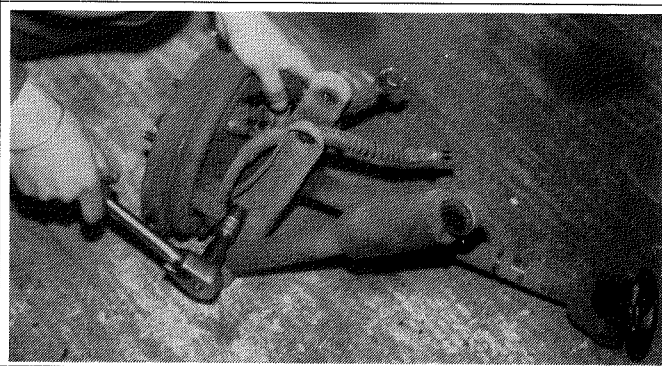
Right tools for the job! 1/2" drive with the correct size of surface drive socket, should give you the right amount of purchase to shift the rear trunnion bolt. This bolt has been known to seize and in the past I have resorted to hacksawing through the bolt either side of the trunnion watershields to free the vertical link and taking the link to a local workshop to have the bolt pushed out on the hydraulic press. Hopefully on your car the trunnions have been maintained properly and the bolt, like ours, came free.
